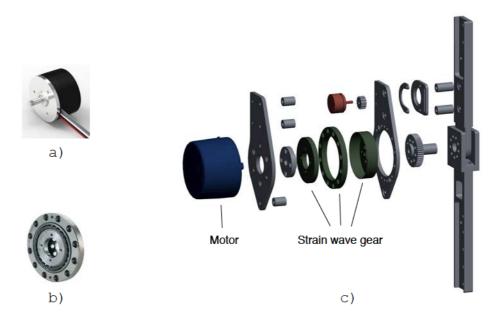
a) BLDC motor used in the H2 joints. b) Strain wave gear used in the H2 joints. c) Exploded view of one knee joint, which can provide 35 Nm of continuous net torque. All six joints use similar design and actuation system.
